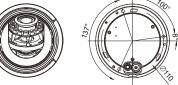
Vandal dome Dimensions (Unit:mm)
